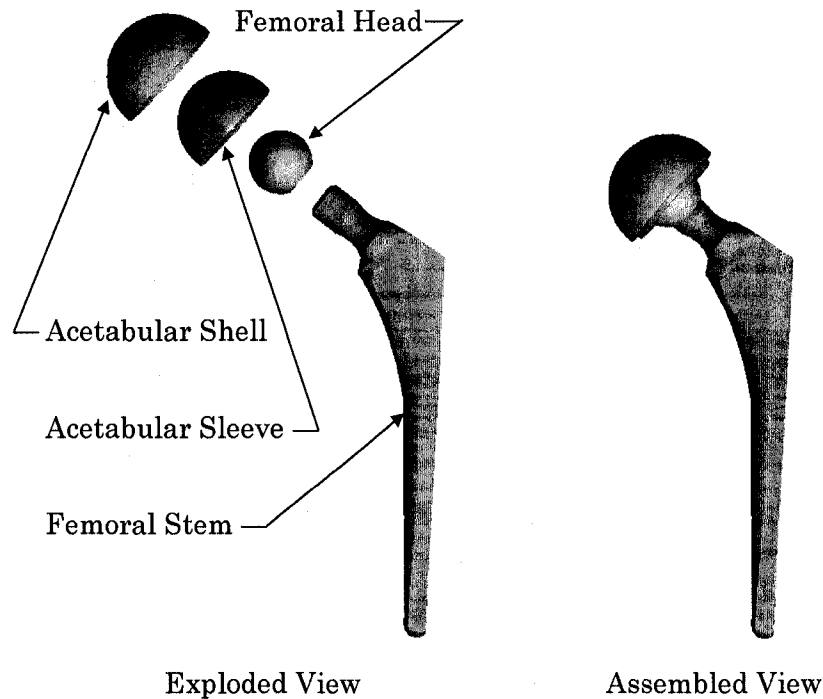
Exploded View and Assembled Views of a typical modular Total Hip Replacement system
